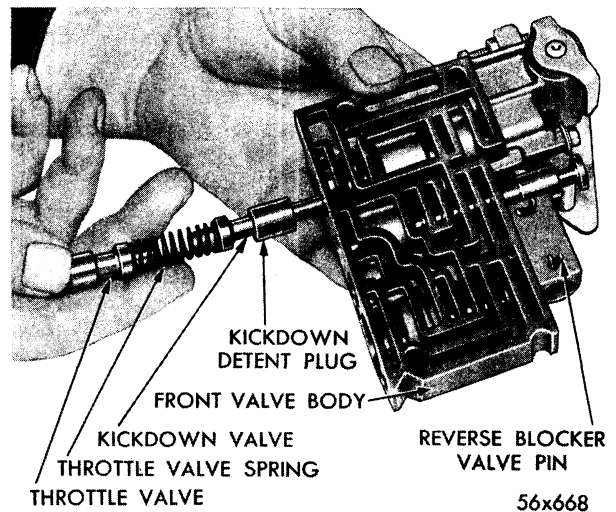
Removal and Installation of Throttle Valve, Spring, Kickdown Valve and Detent Plug
